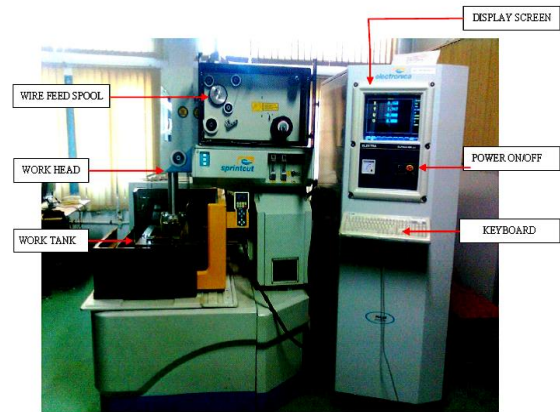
Wire-cut EDM (ELEKTRA SPRINTCUT-734) of Electronica Machine Tools Ltd.
